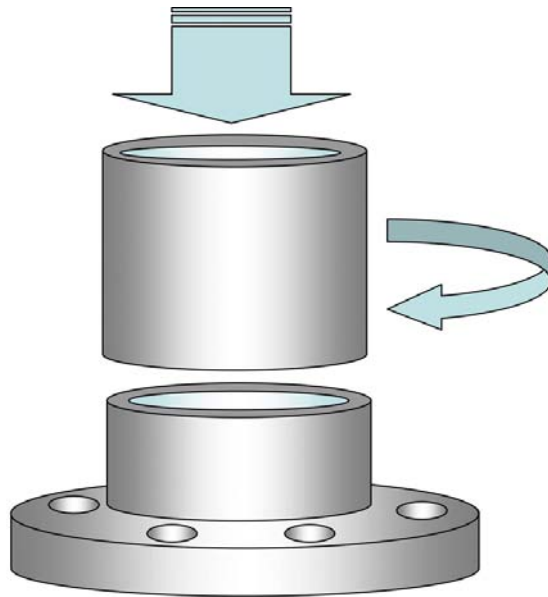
Schematic representation of the use of friction welding to fabricate flanges from ODS alloys.
